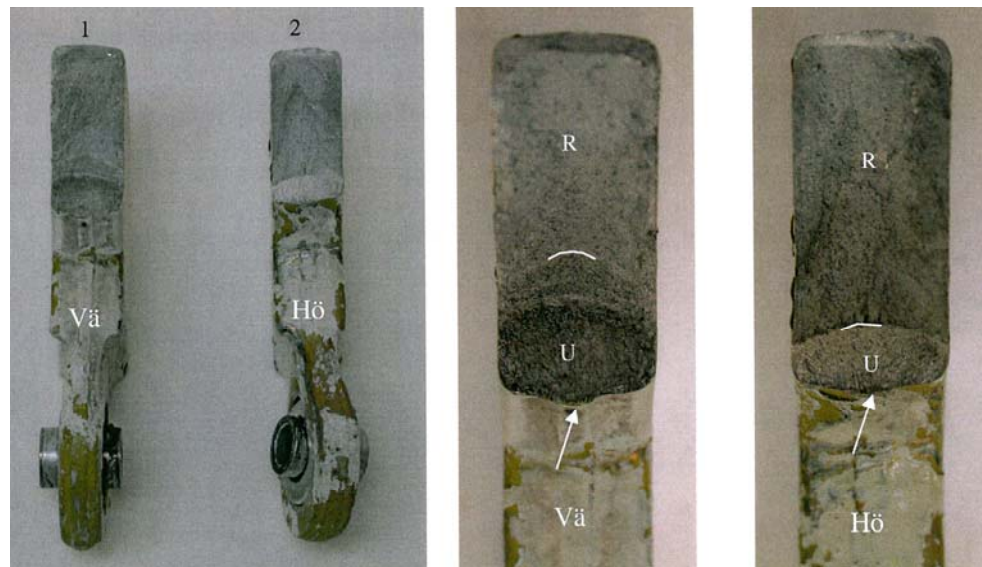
Left main landing gear door front hinge assembly (Vä = left) and right main landing gear door front hinge assembly (Hö = right). The starting point (arrow) and boundary between fatigue (U) and remaining fracture (R) are marked
